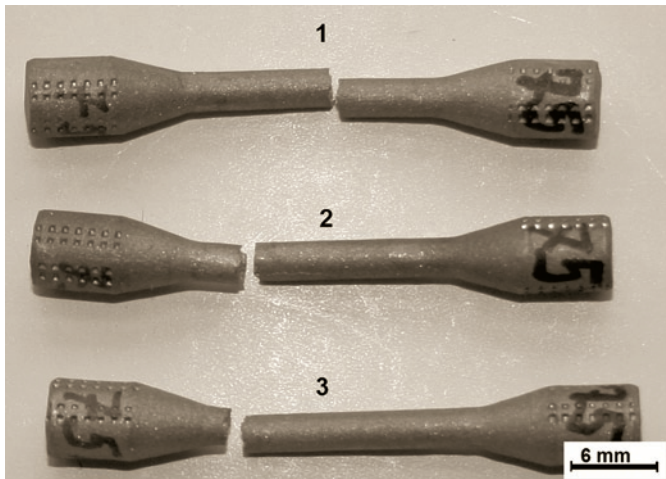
Samples after a static tensile test: 1 – a fracture on the measuring length; 2, 3 – fractures out of measuring length
